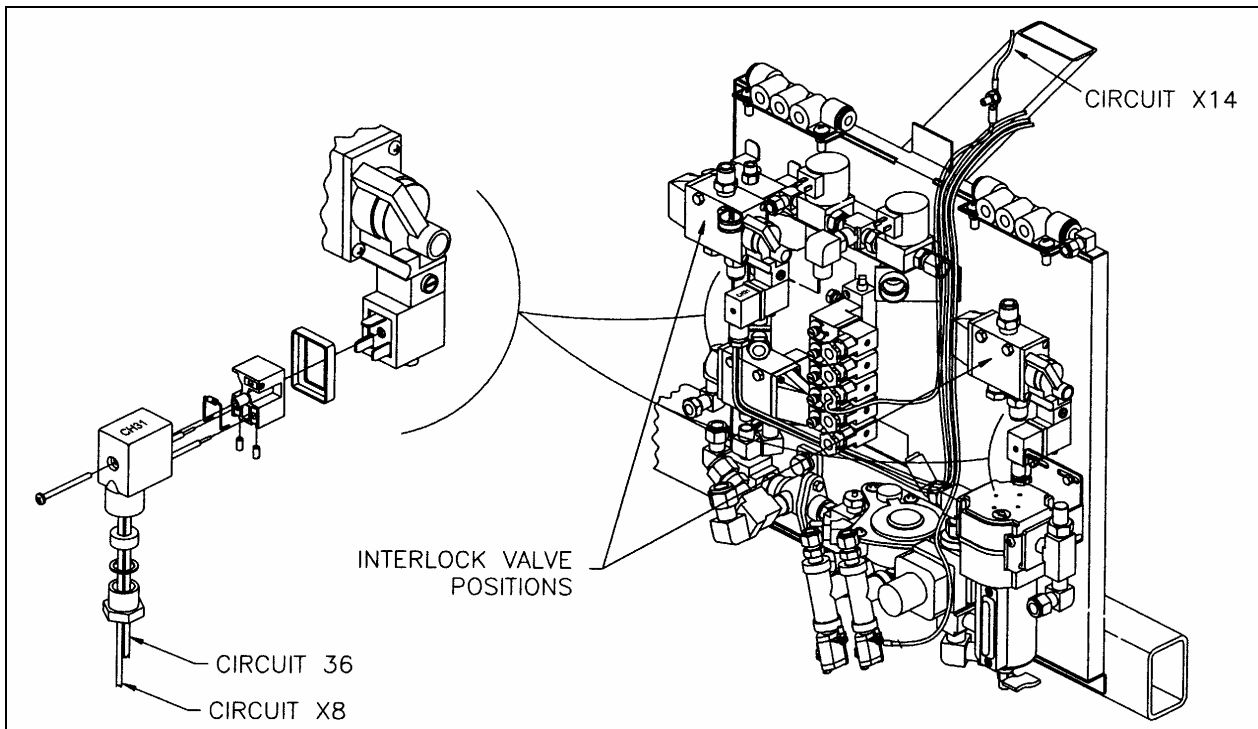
INTERLOCK VALVE CONNECTIONS
